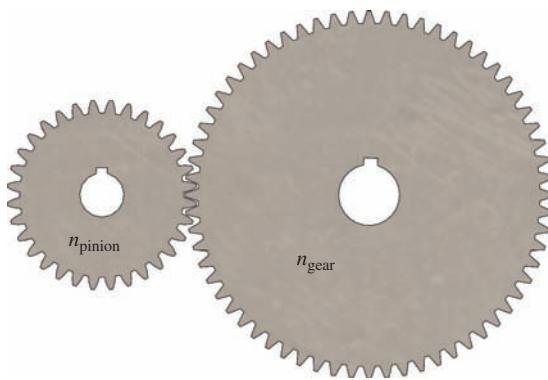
Two spur gears in mesh with the pinion driving the gear
